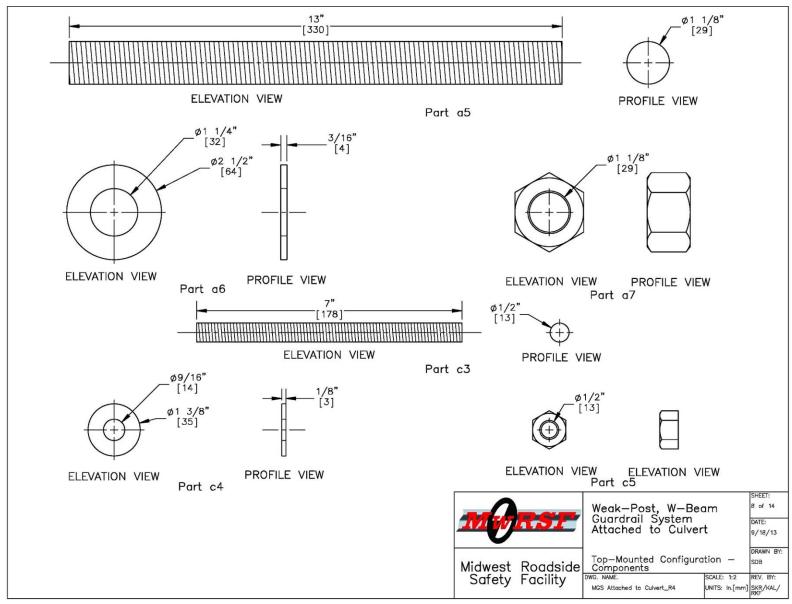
Top-Mounted Configuration, Attachment Hardware Details
